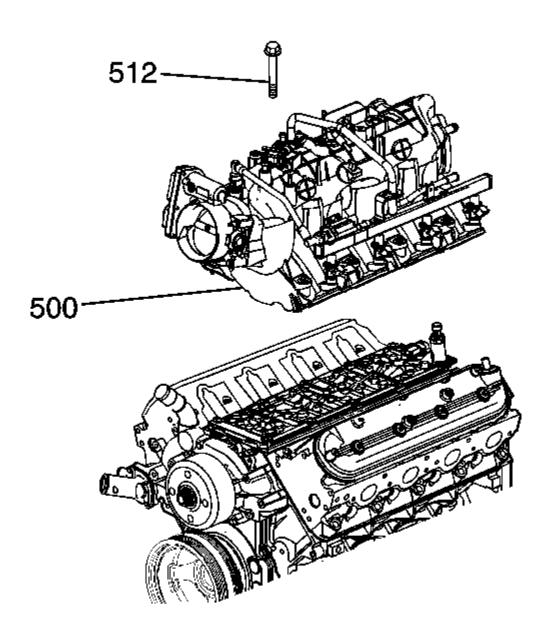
Intake Manifold Courtesy of GENERAL MOTORS CORP.
